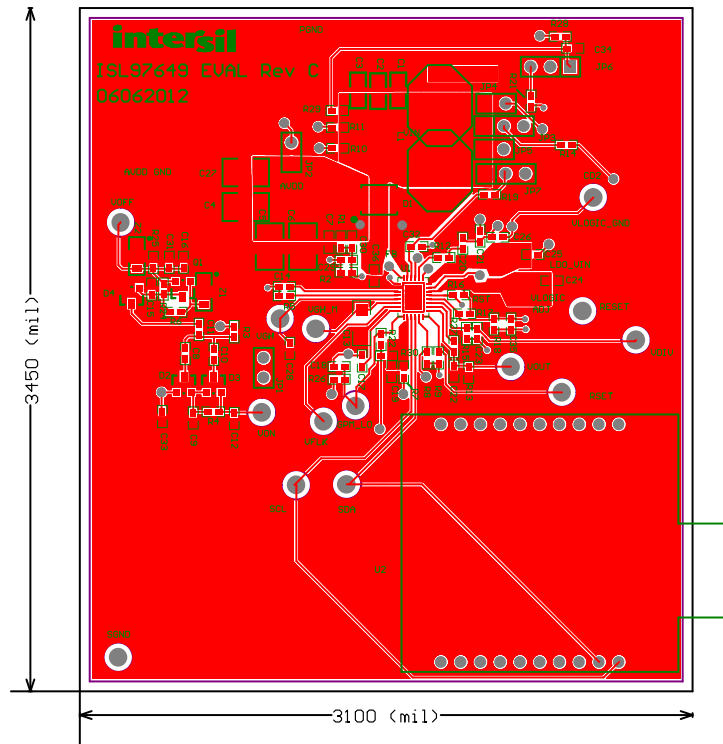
EVALUATION BOARD ASSEMBLY LAYER
